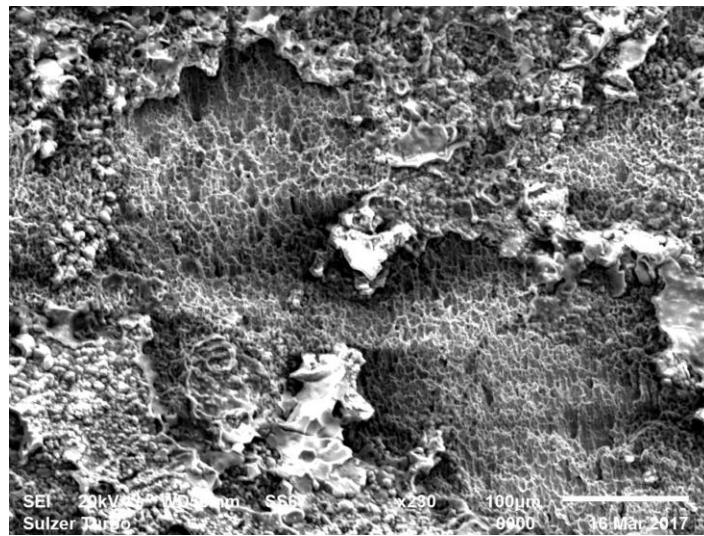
Top Pin Fracture Surface Showing Signs of Ductile Failure
